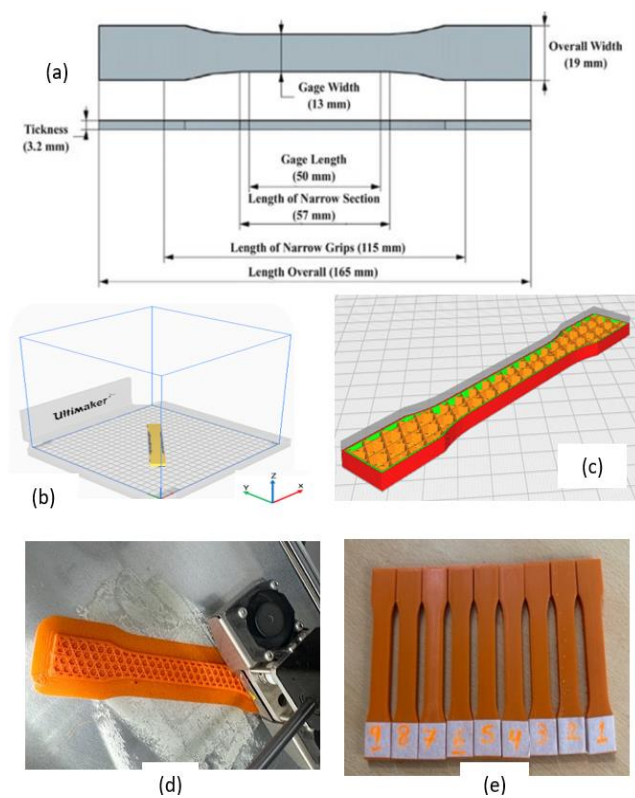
(a) The geometry tensile specimen ASTM D638 standard, (b) The specimen is placed on the 3D printer bed using Cura 5.5.0 software, (c) The process involves cutting samples, (d) Producing samples using an Ultimaker 2+ printer, and preparing the tensile specimen for examination, (e) Final samples.
